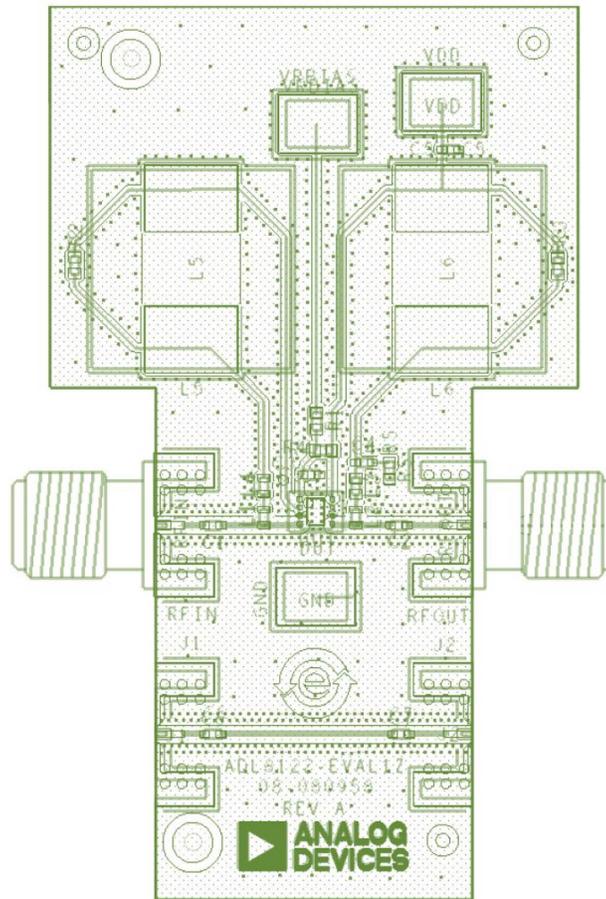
ADL8122-EVALZ Assembly Drawing (J1 and J2 Not Installed)
